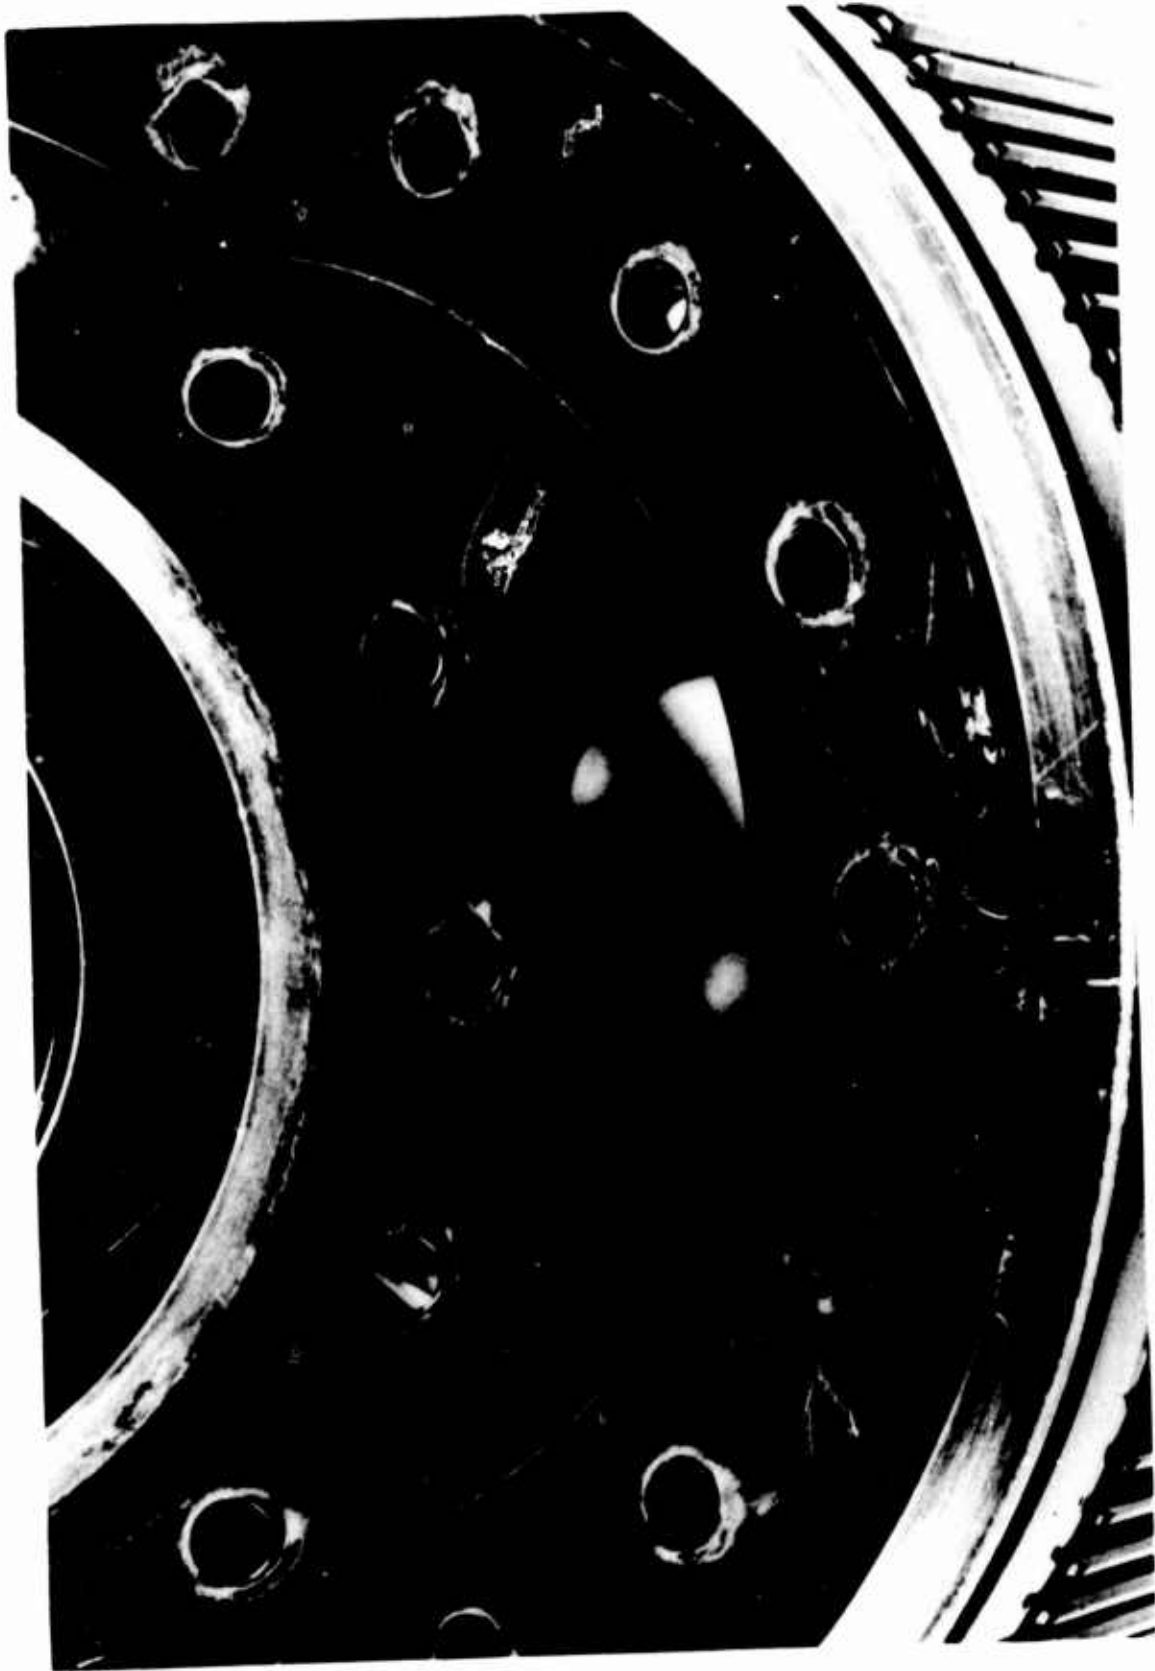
Fretting - Second-Row Pinion, Gear/Flange.
